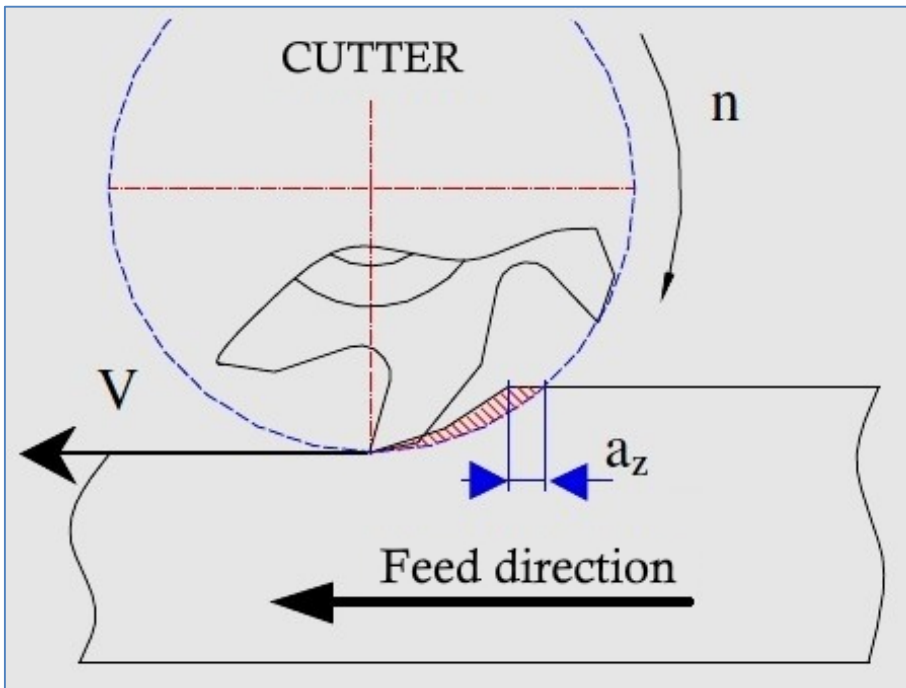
Relative movement between cutter and workpiece with concordant feed direction
